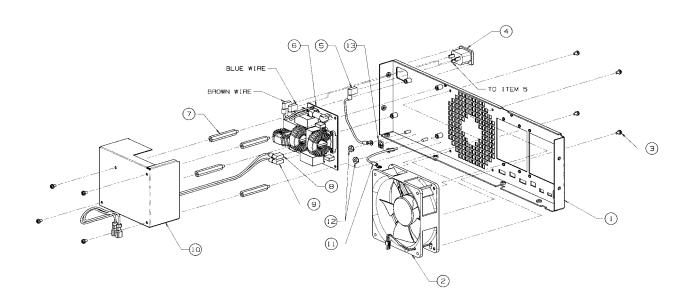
CE4000 Back Panel Assembly (Exploded View)
